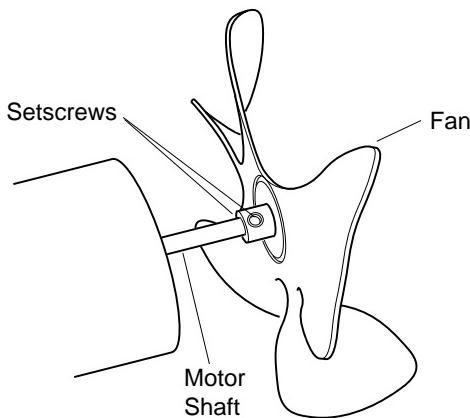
Fan, Motor Shaft, and Setscrew Location
